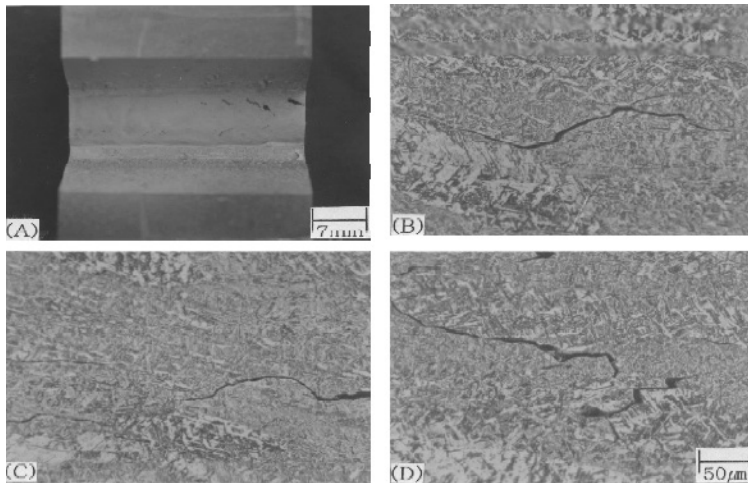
Various cracks in deposited weld metal welded with 103 ppm boron content wire.
